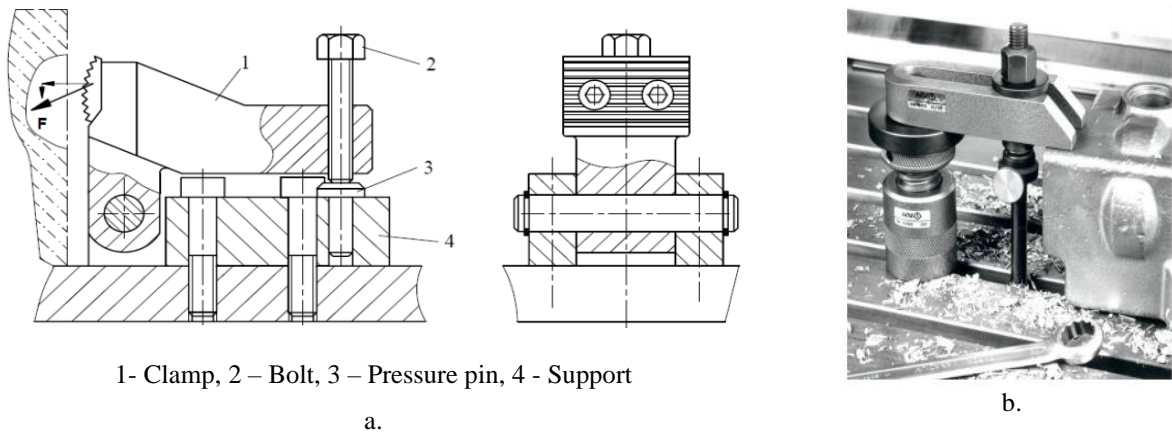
Fixing mechanisms: bolt – hinged clamp (a); bolt – nut - clamp (b) [3]
